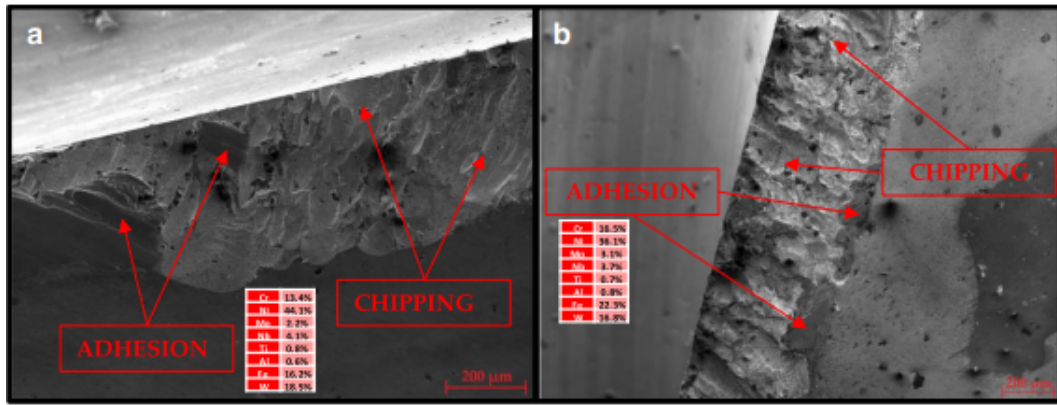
Flank wear of uncoated cemented carbide tools after end milling of Inconel 718 (FILHO et al., 2019).
